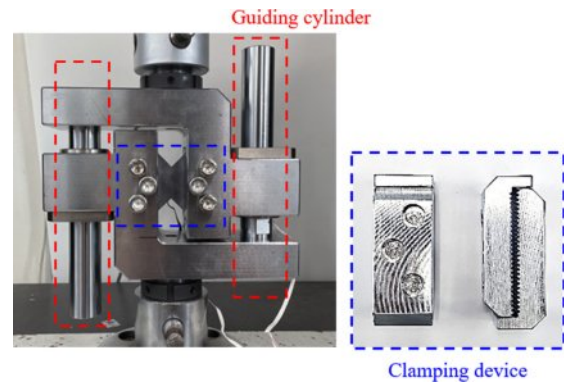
Geometry of the pure shear test fixture with guiding cylinders and redesigned clamping devices
